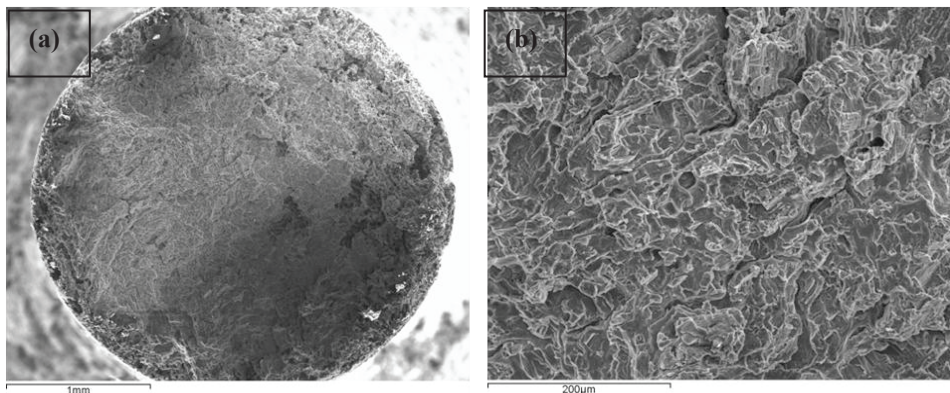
Fractograph of specimen failed in *m*-SBF at strain rate $1.2 \times 10^{-7} \text{ s}^{-1}$: (a) overall fracture surface of specimen, (b) fractograph showing transgranular cracks and a few secondary cracks
